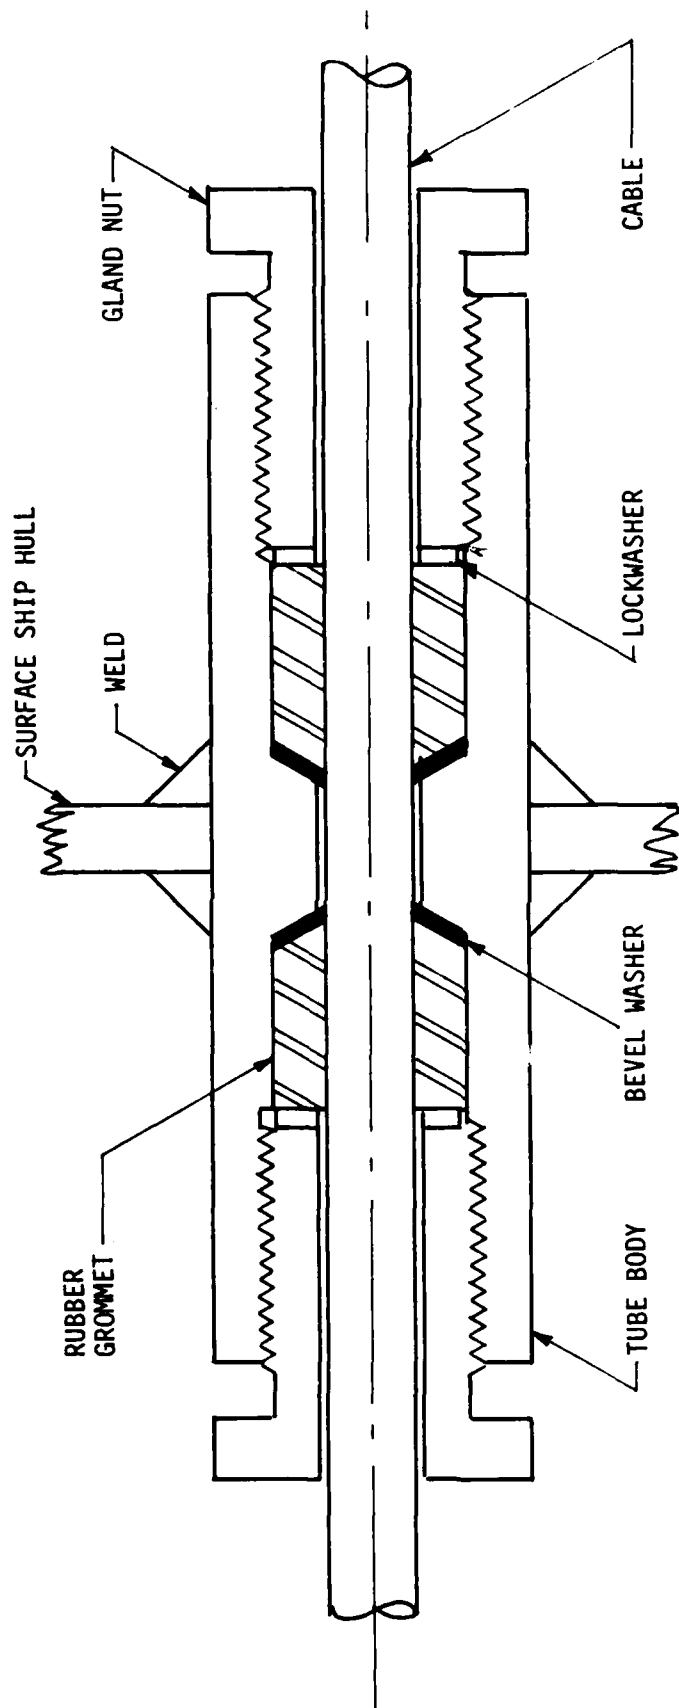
SURFACE SHIP CABLE STUFFING TUBE PENETRATOR
